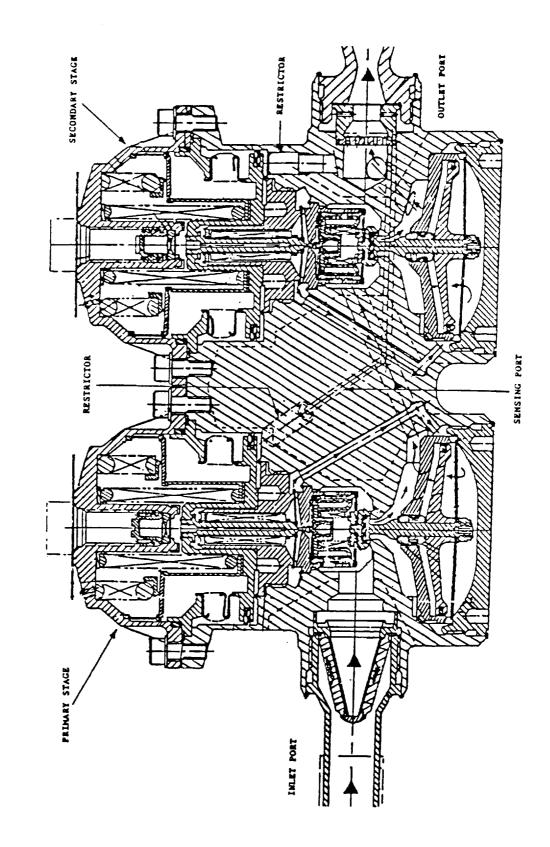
HELIUM PRESSURE REGULATOR ASSEMBLY
